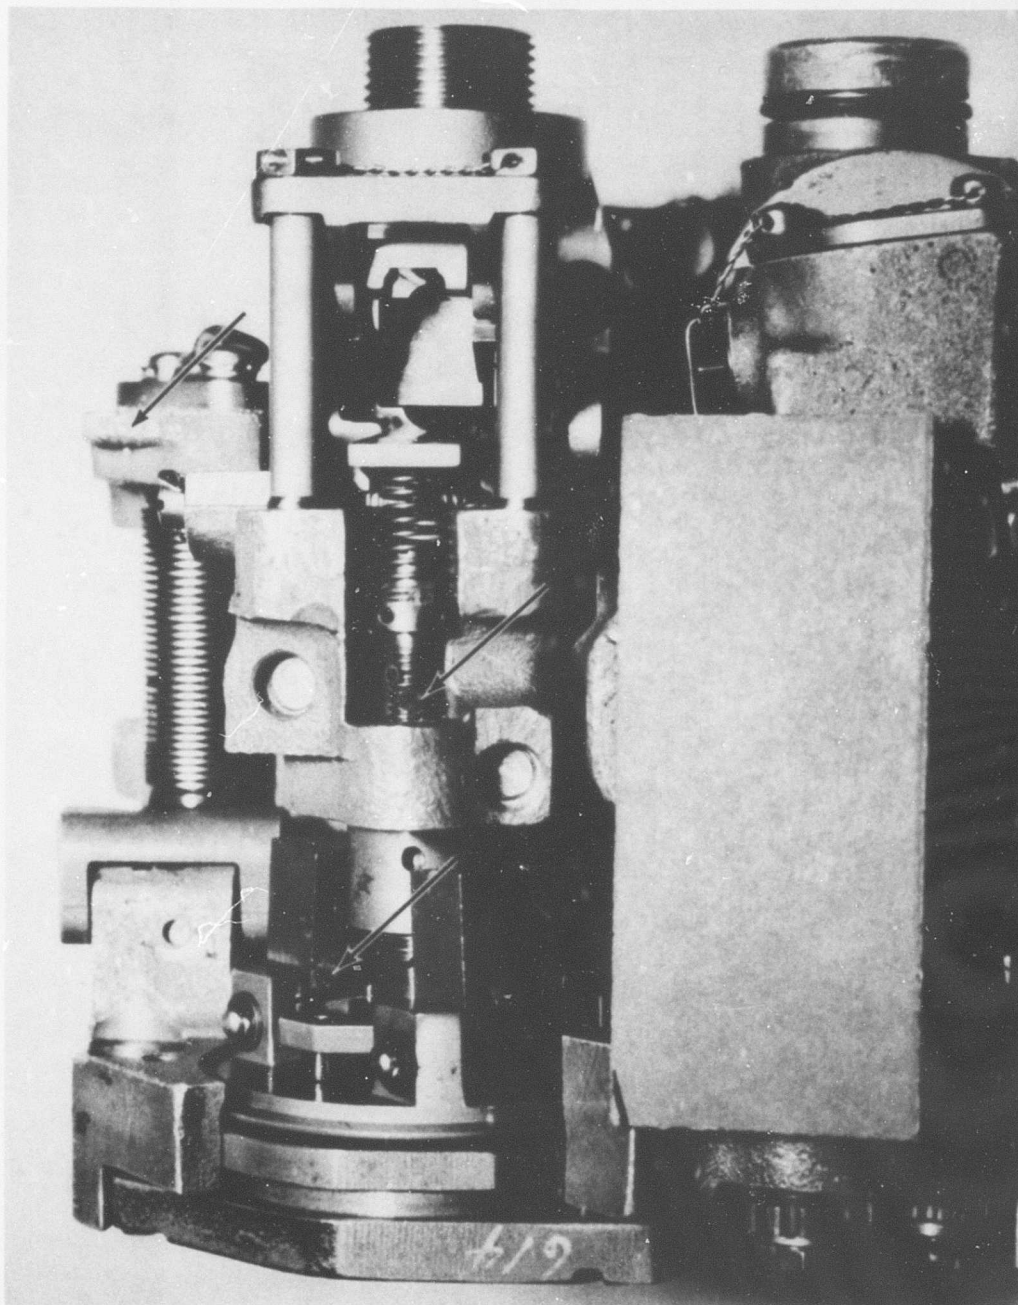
Fuel Control Computer Assembly Removed from Housing; End View. (Note rust deposits.)
